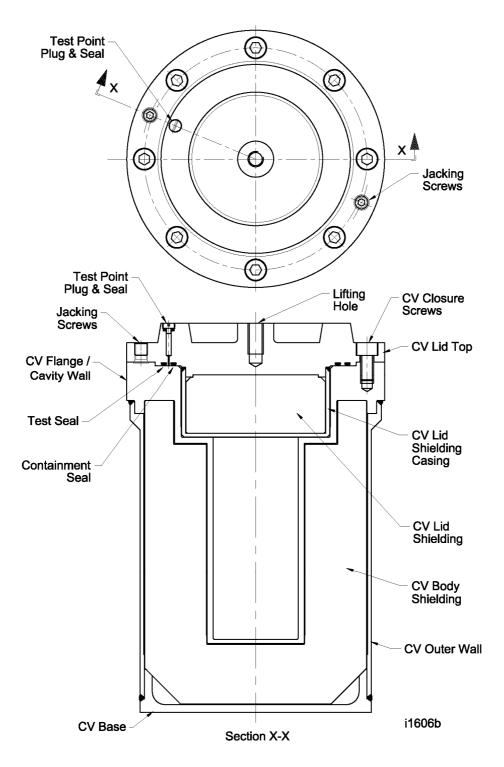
3978 Containment Vessel - Top and Sectional View with Nomenclature
